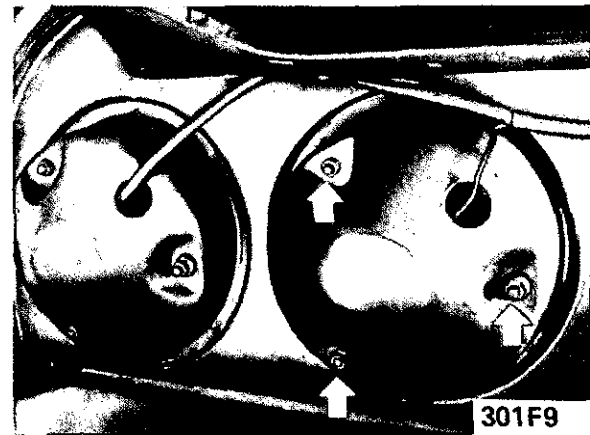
F-9 Tail Light Housing Attaching Nuts - Models 57-57R
